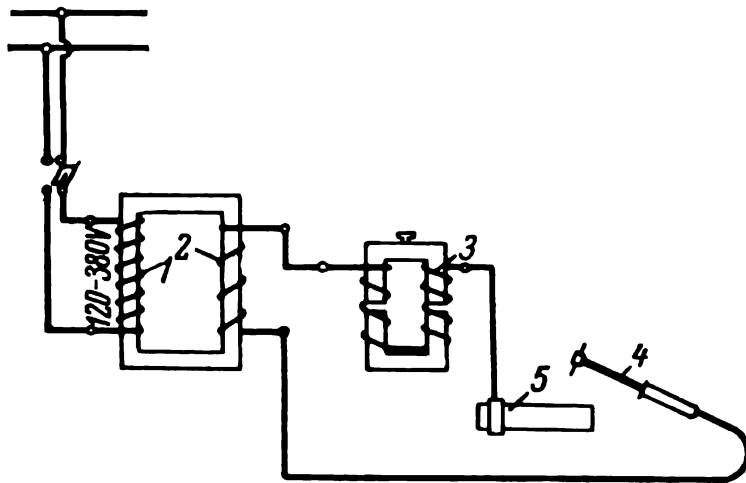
Circuit diagram of the CTЭ welding transformer:
